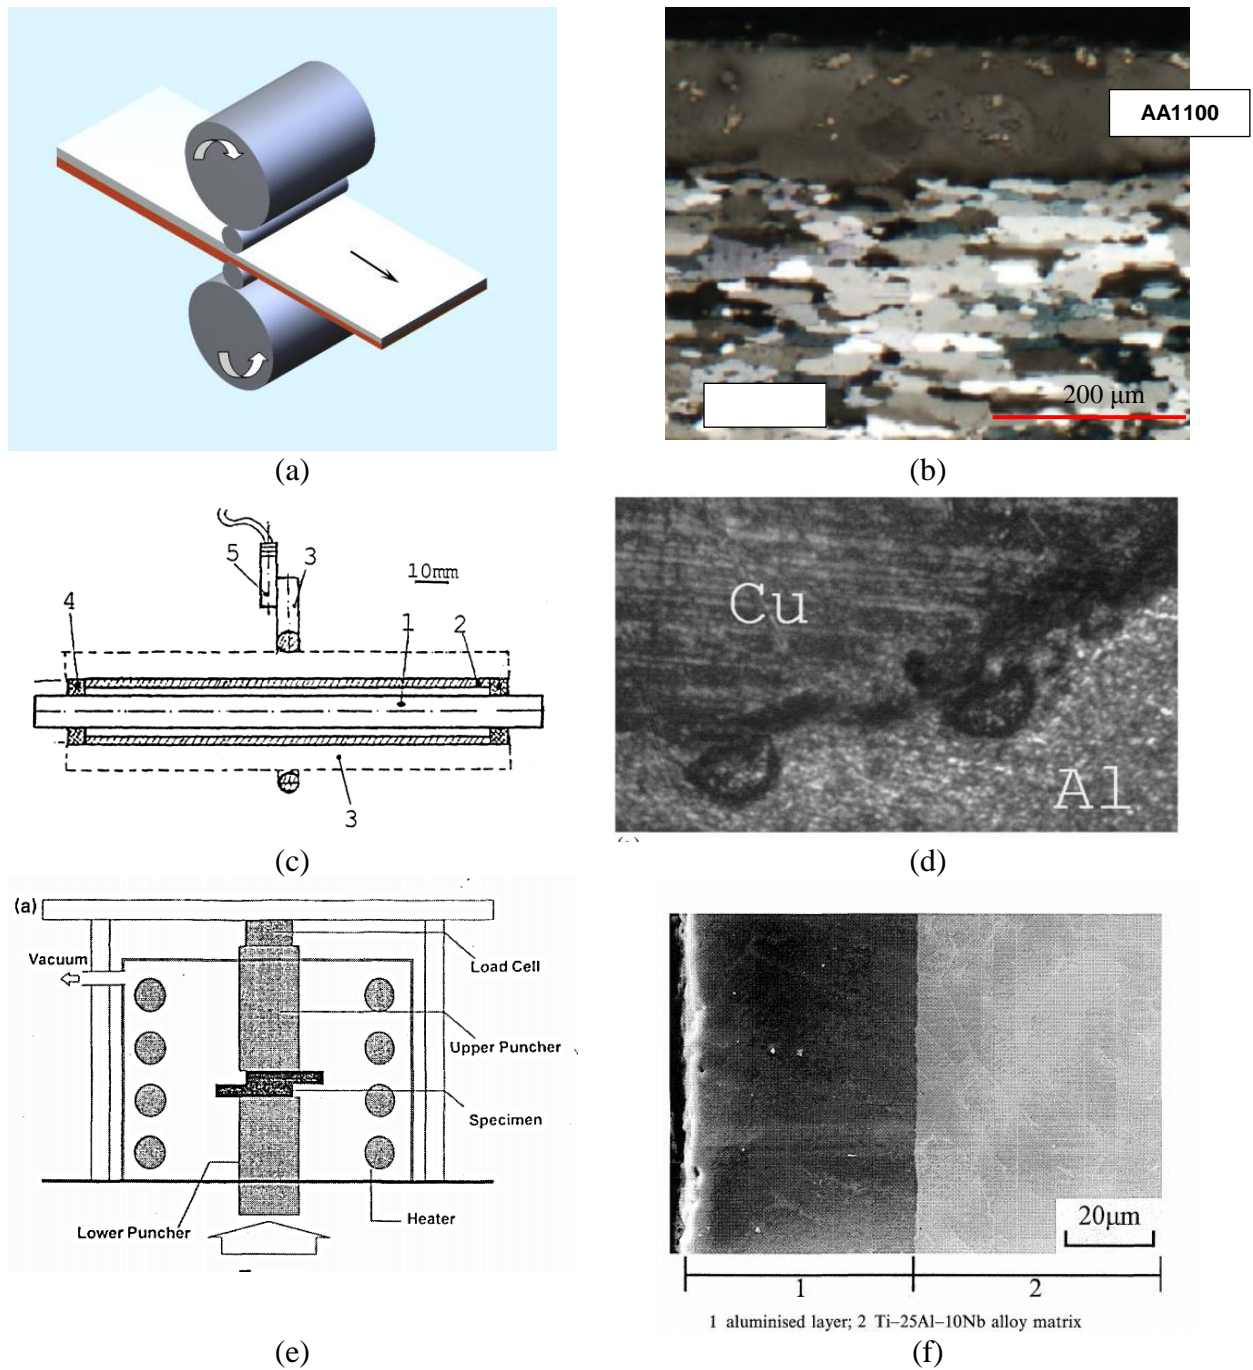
Schematic of different lamination processes (a) roll bonding process, (b) optical micrograph of roll bonded AA2024/AA1100 specimen; (c) explosive welding process; (d) optical micrograph of explosive welded copper aluminum (Mamalis et al, 1998); (e) diffusion bonding process, (f) aluminum titanium alloy joint (Wu et al. 1998).
